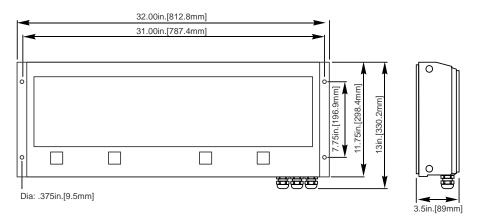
XR 4500TL and XR 6500 Outline dimensions and hole pattern
